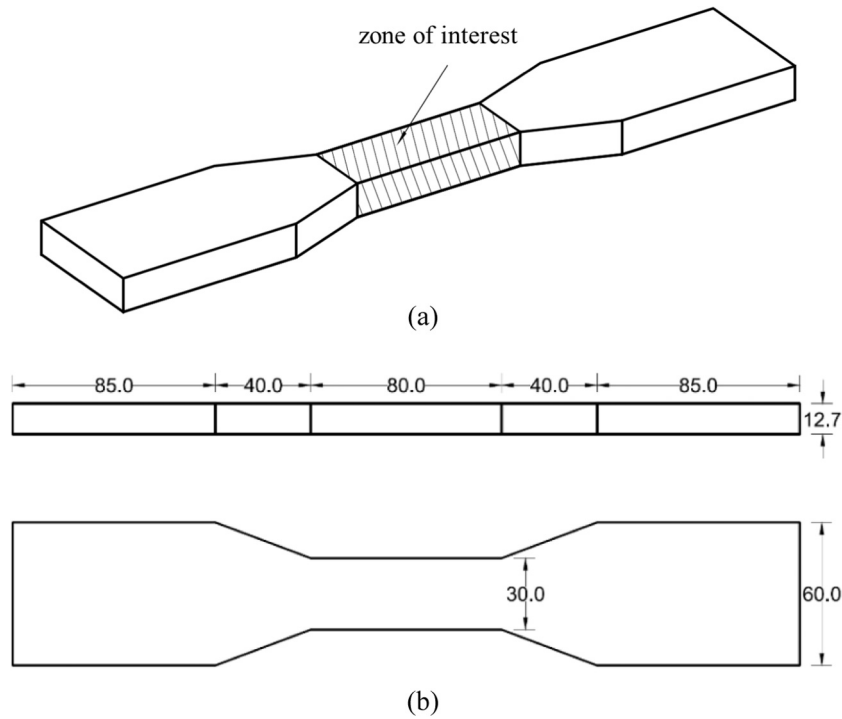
a) Interest zone and; b) dimensions of a dumbbell shaped specimen.
